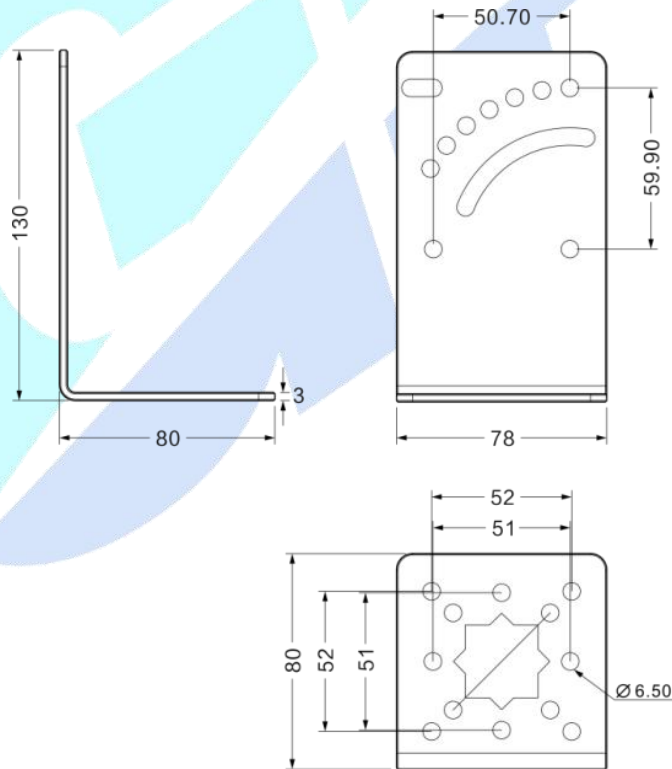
Outline Drawing of bracket (Non-standard) (Unit: mm)
